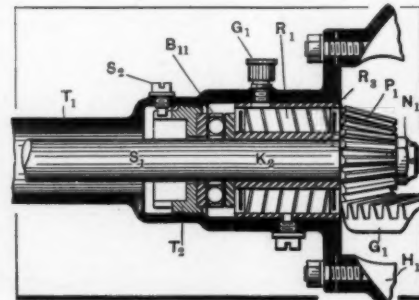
Section of a rear axle, showing the jackshaft mounted on a Hyatt roller bearing and the end thrust taken by a ball-thrust bearing
